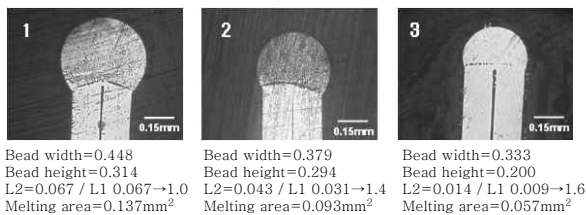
Image analysis of welded bellows bead geometry depend on tip height from base metal
